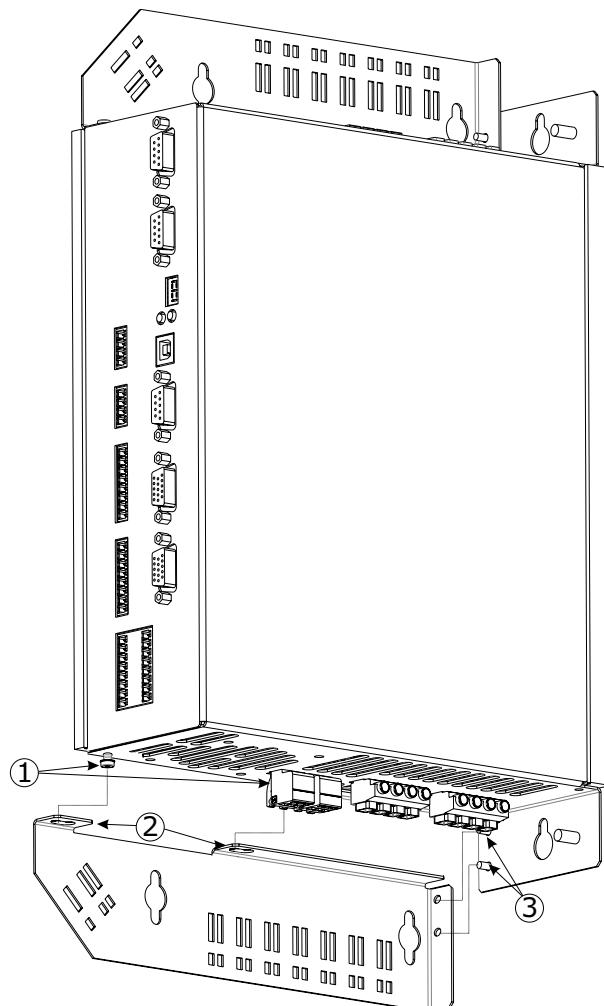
Mounting of the shield plate (example: lower shield plate)
